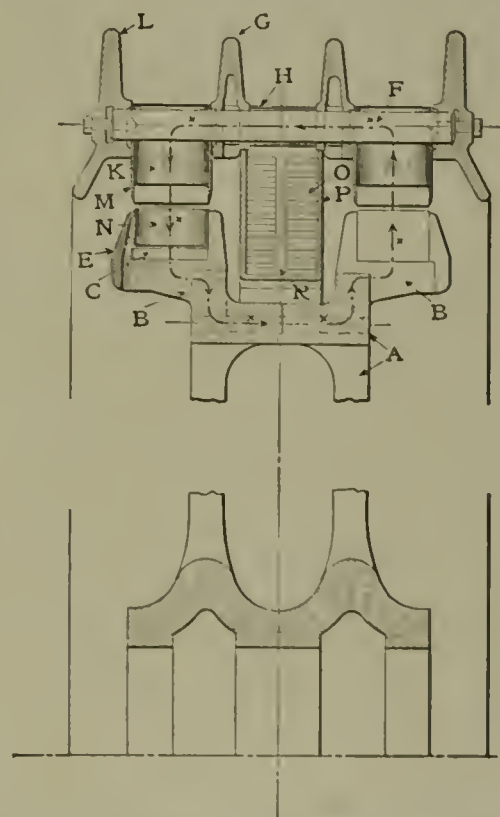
SECTION OF A STANLEY-G. I. ALTERNATOR, SHOWING THE MAGNETIC PATH
